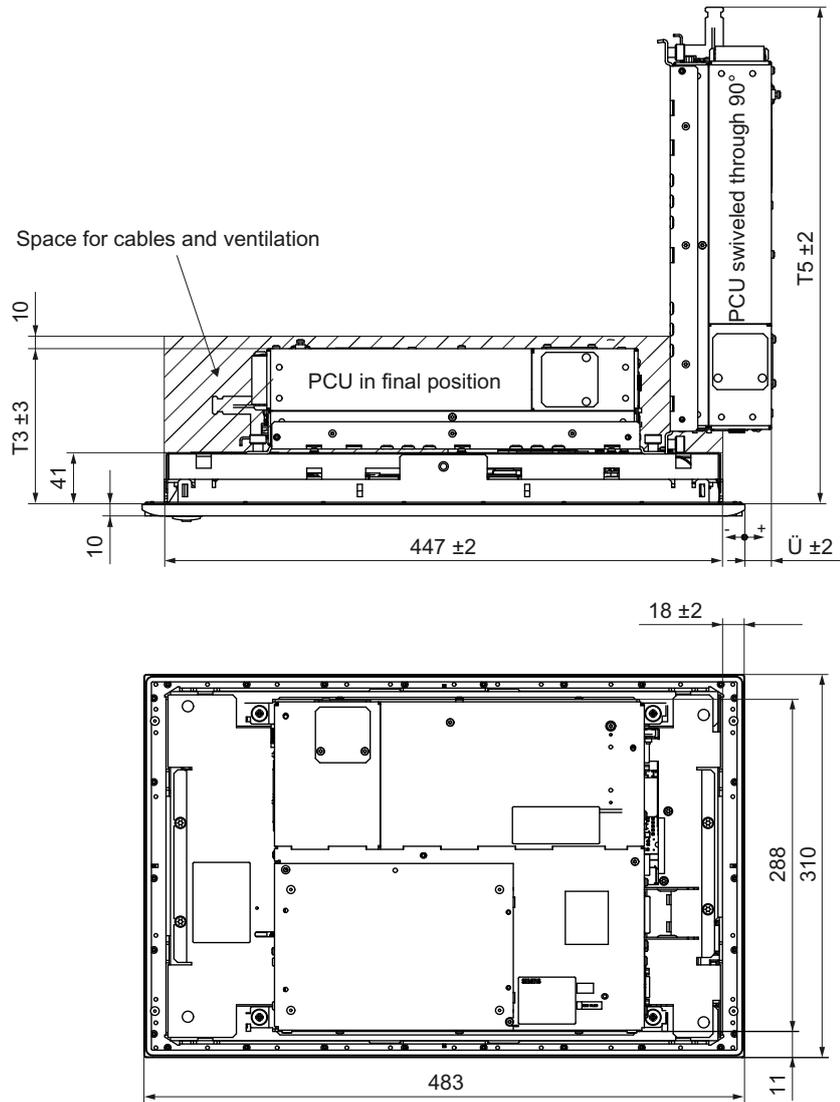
Dimension sheet for mounting the OP 015 with PCU
